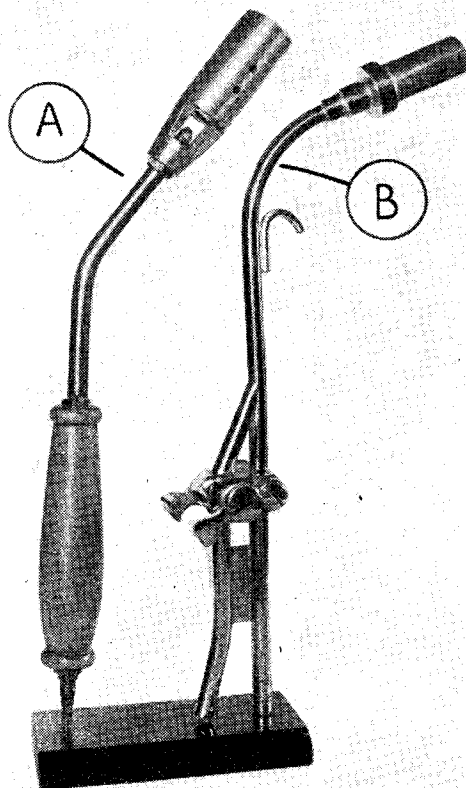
Torches for use with Calor gas. "A"—torch for silver-soldering; "B"—torch for brazing, using compressed air and gas at low pressure
